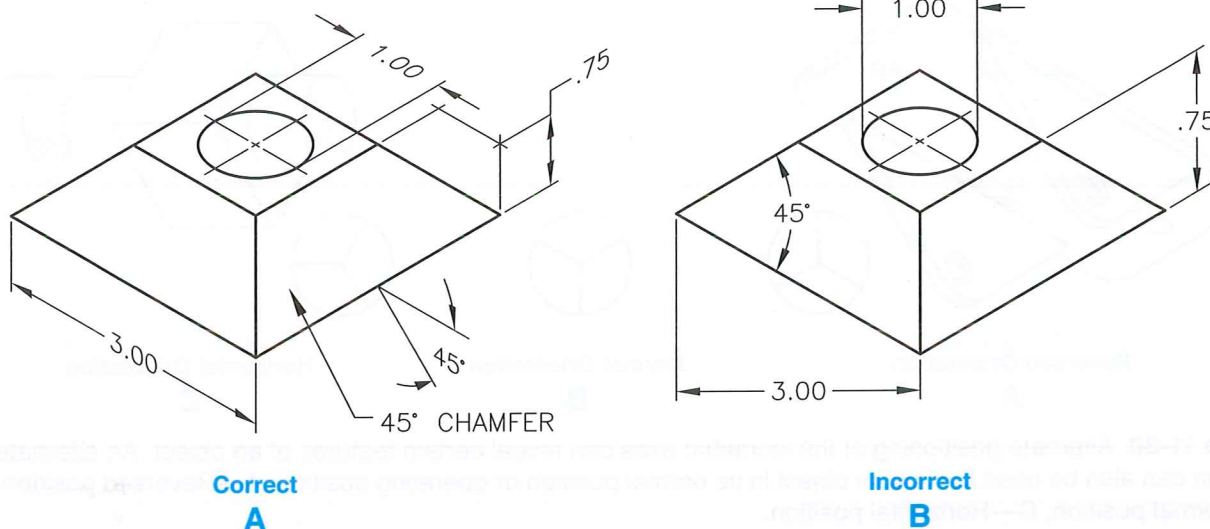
Isometric dimensions should be placed in the plane corresponding to the feature being dimensioned. A—If necessary, add additional extension lines to locate a dimension. B—Incorrect practices.
